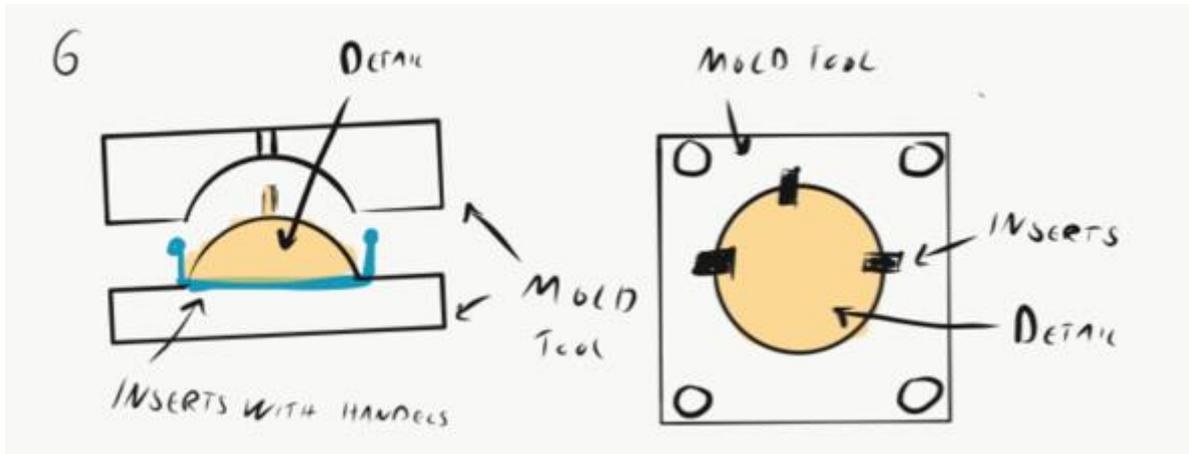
Concept 6: *Inserts Between Cavities* uses inserts in strategic positions in the mold that can later be used as leverage when ejecting the injected molded detail.
